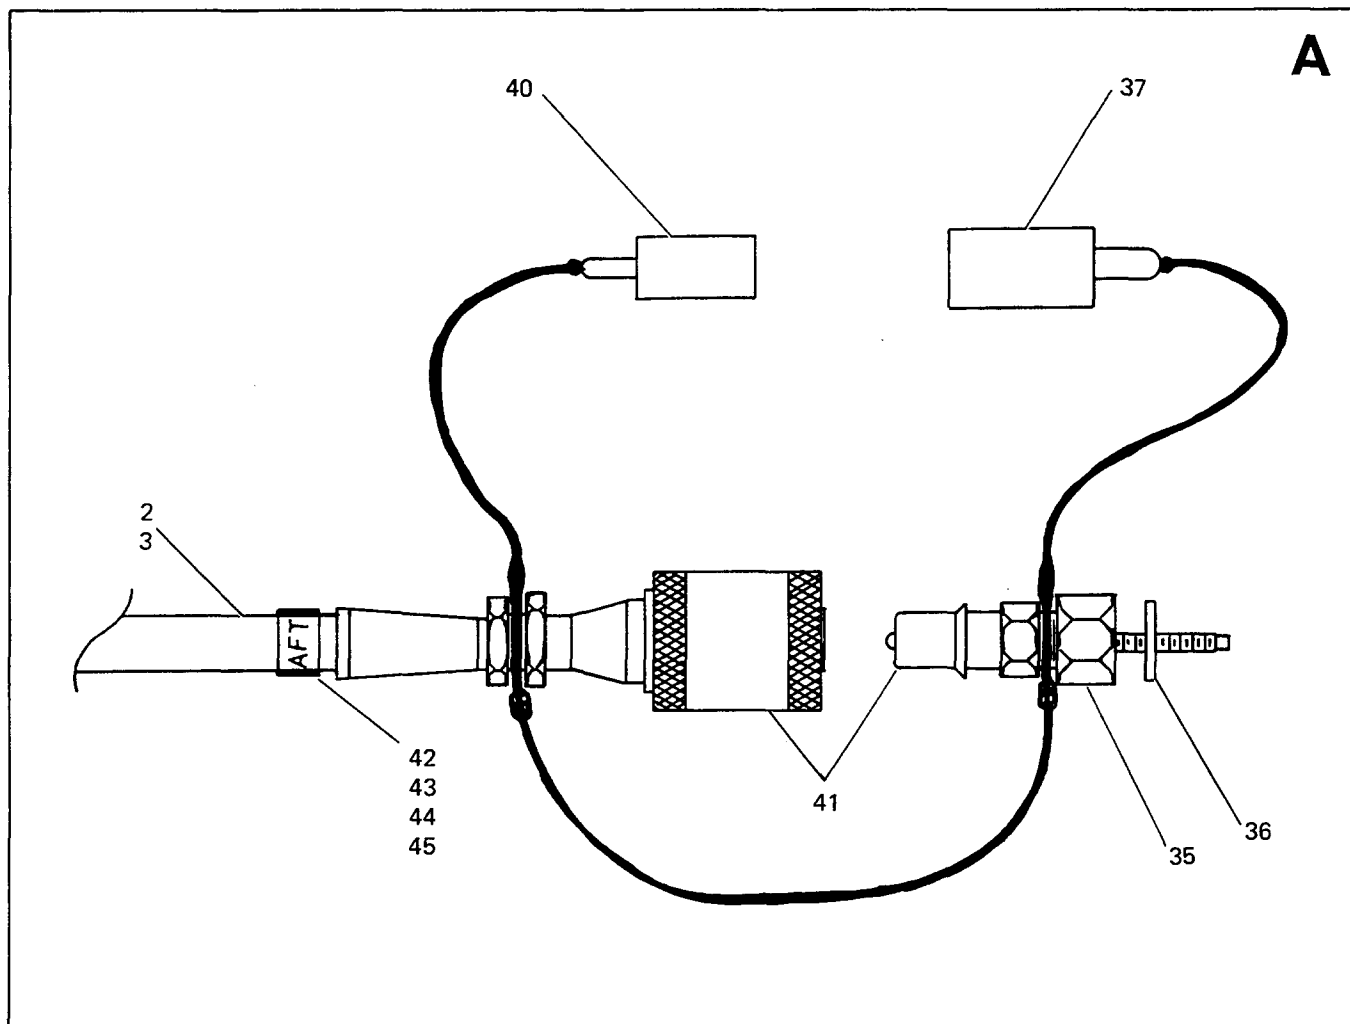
Panel Assembly (Sheet 3 of 3)
